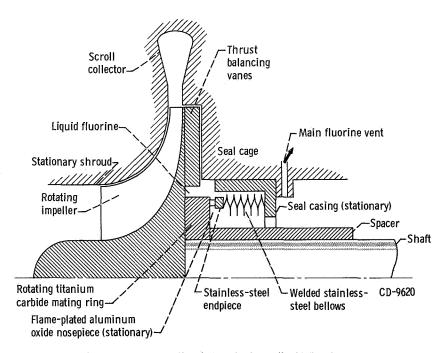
Cross-sectional view of primary liquid-fluorine seal.
